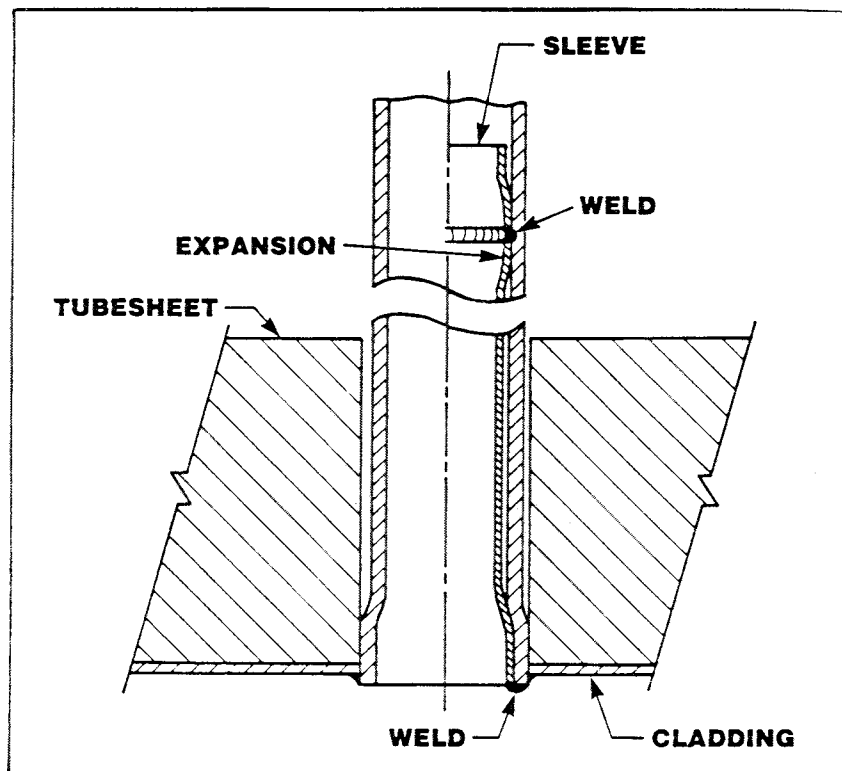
Bechtel/KWU Welded Sleeves
